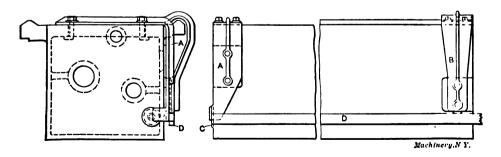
Jigs used for Drilling Lead-screw Box Boit Holes in the Bed
